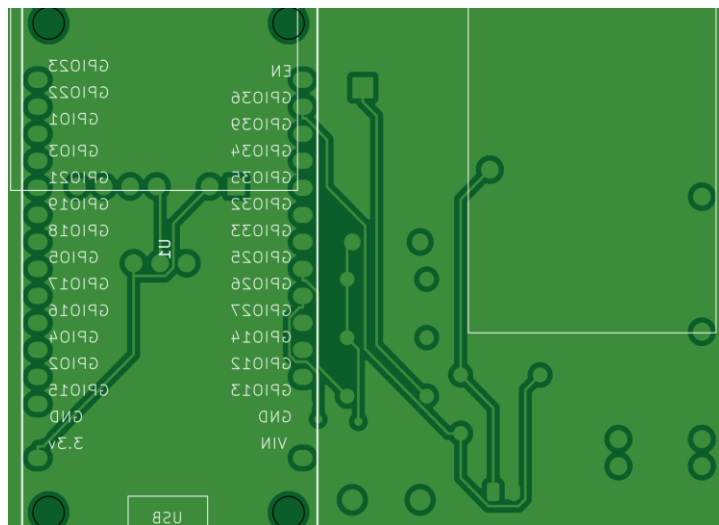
PCB bottom view; bottom-layer routing handles I²S and indicator returns.
